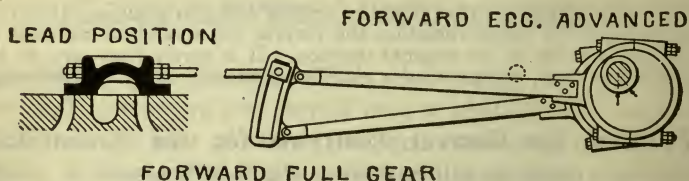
Setting the link motion: 3. *Locating the eccentrics—second step:* With link in forward full gear, the forward eccentric is advanced until valve shows proper lead, bringing valve into its forward linear advance position.
